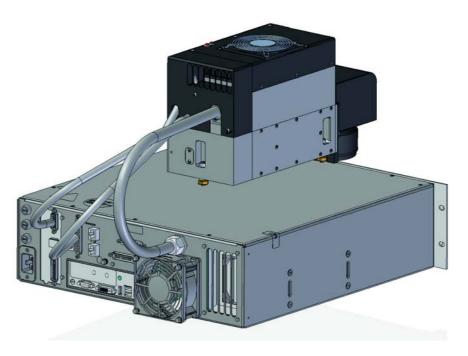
System view with laser head and plug-in supply unit, rear view
